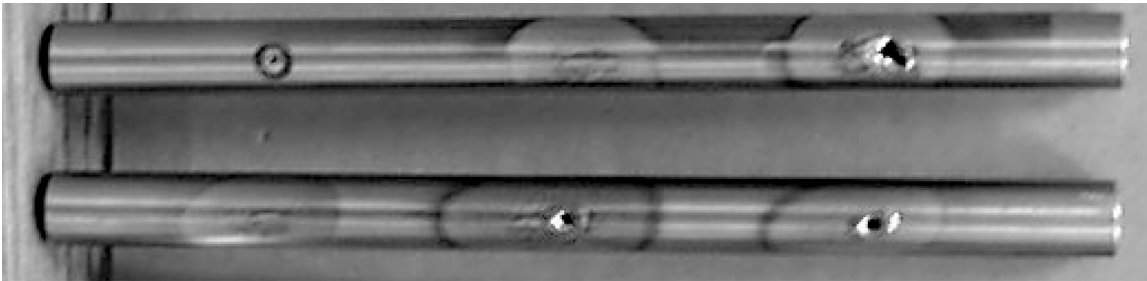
Ti-6Al-4V tube plug weld (test sample).
